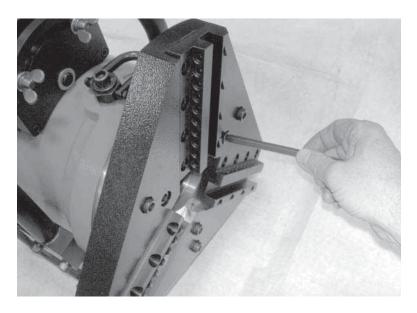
Tighten the 6 screws holding on the rotating head.
